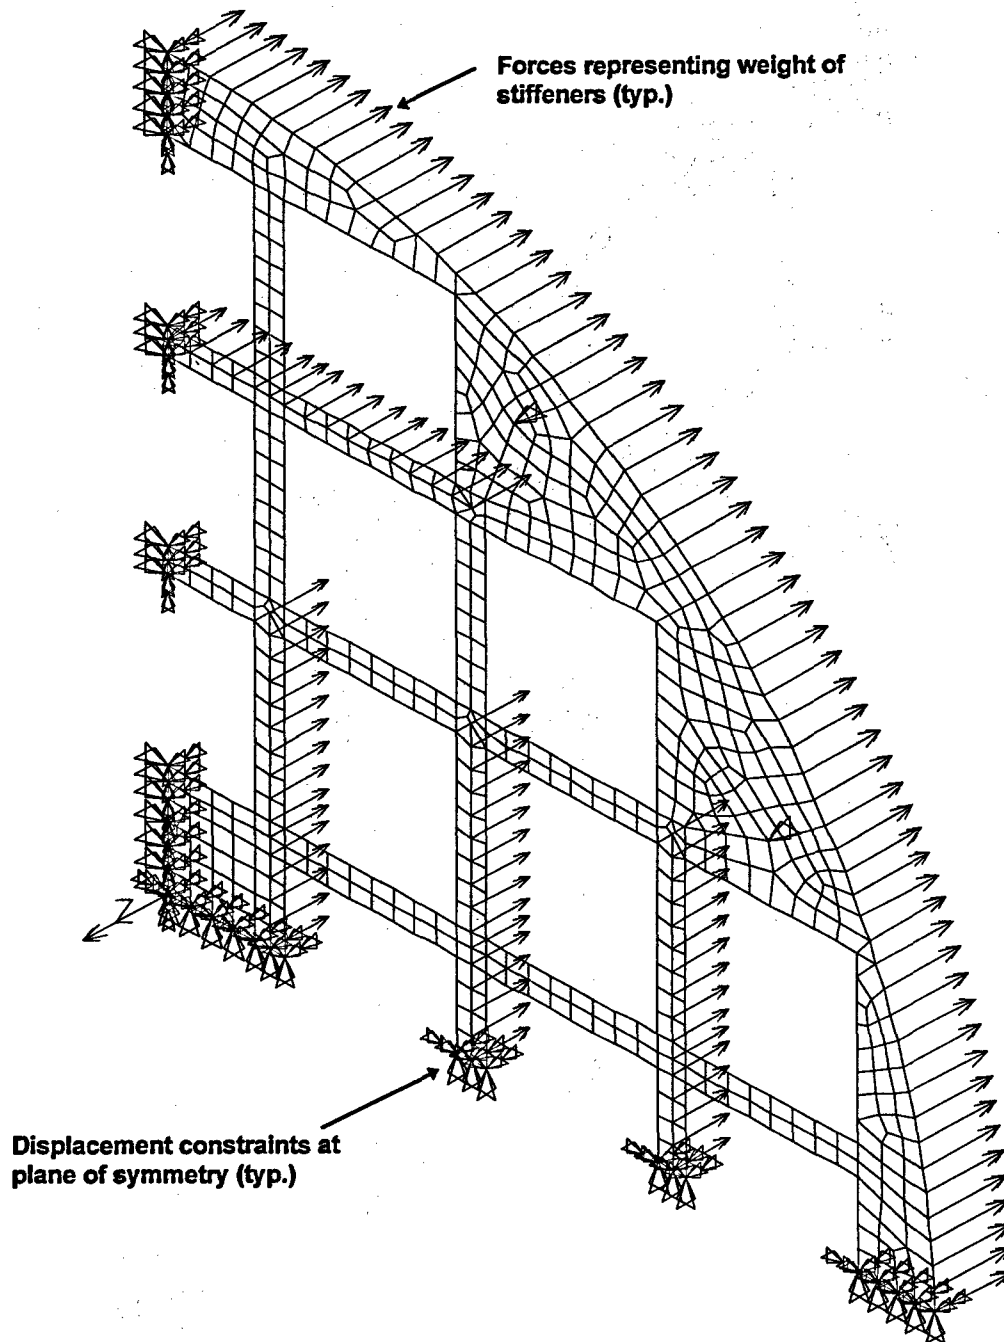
Fuel Basket Bottom Weldment ANSYS Finite Element Model
